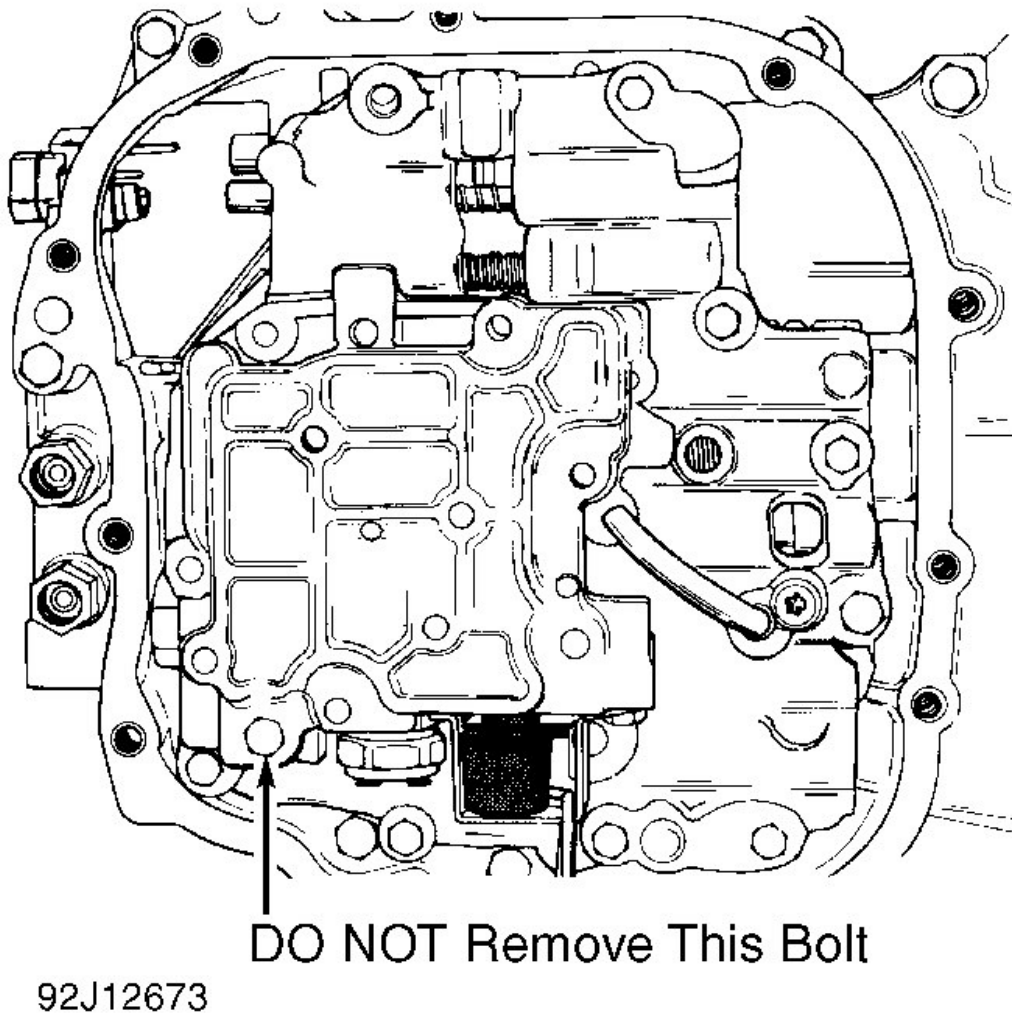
Locating Control Valve & Pump Assembly Lower Left Bolt
